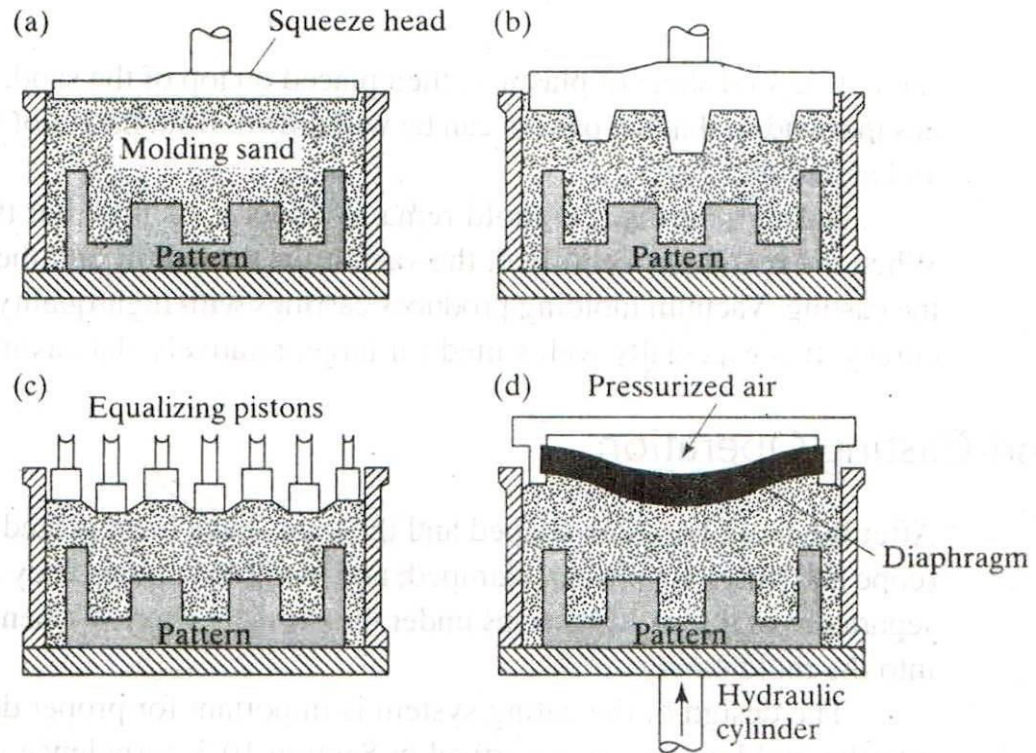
Various designs of squeeze heads for mold making: (a) conventional flat head; (b) profile head; (c) equalizing squeeze pistons; and (d) flexible diaphragm.
